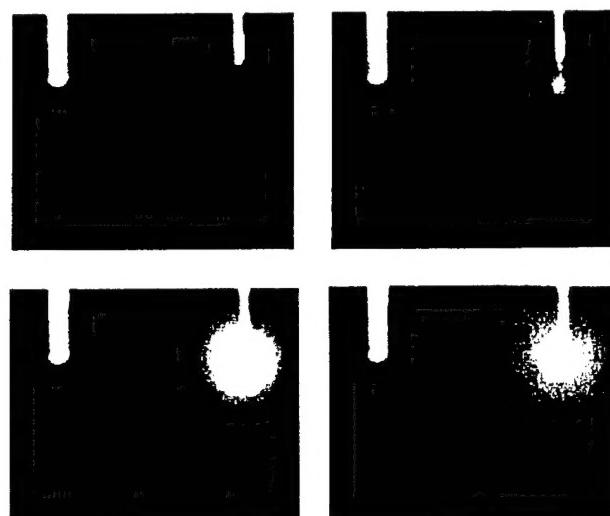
Selection of four frames from a sequence of sonic IR images of a fatigue specimen containing two saw cuts, but with only one (right) having been used to initiate a fatigue crack.
